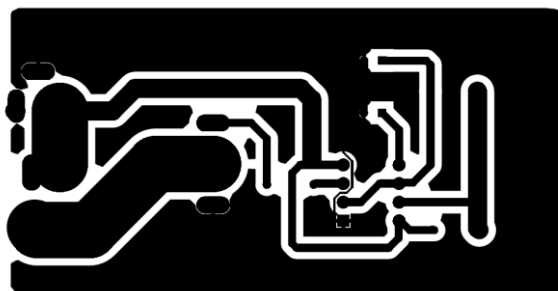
Plasma Electronic board (2D) for CNC printing .
